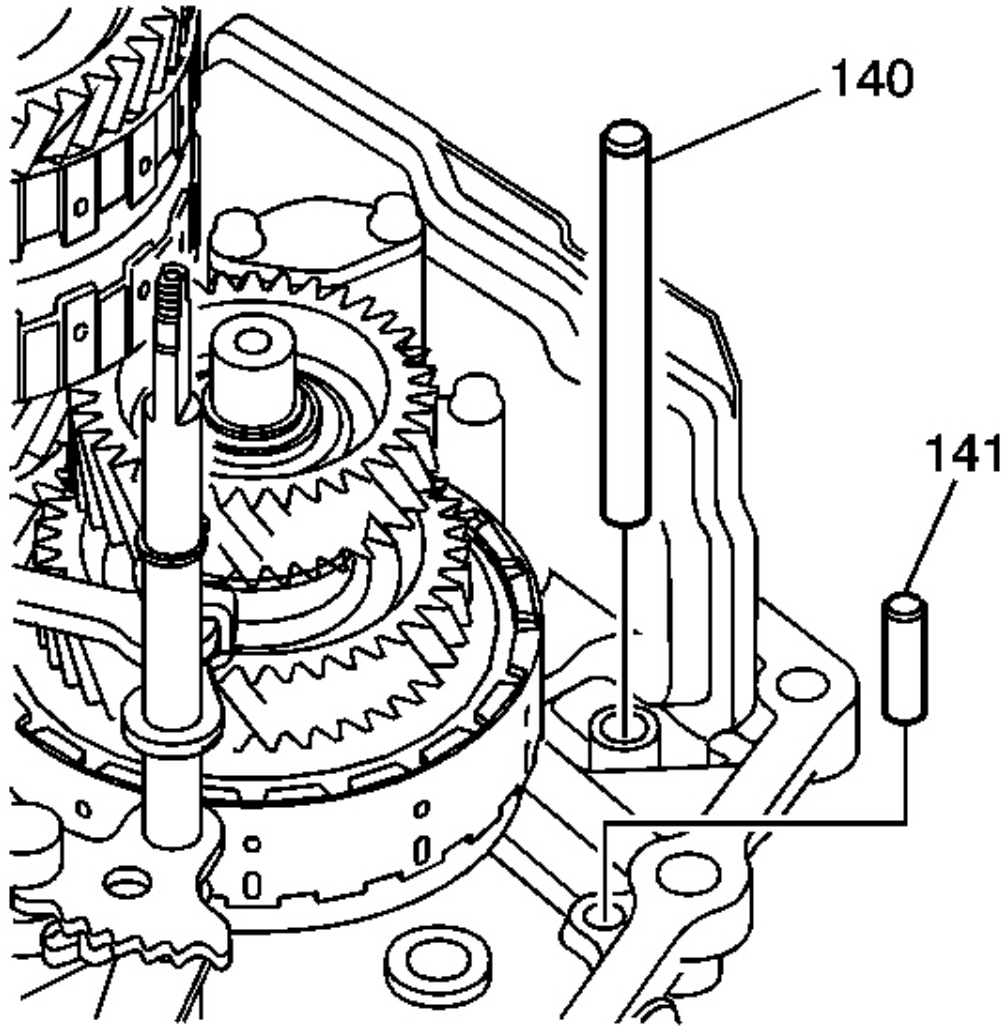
Clutch Apply Fluid Pipe & Transmission Fluid Cooler Pipe
